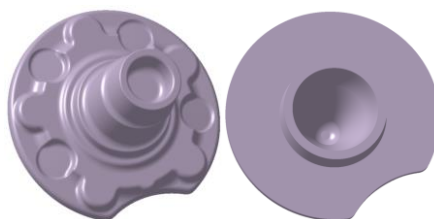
Three-dimensional model of the automotive wheel-hub-bearing inner ring
